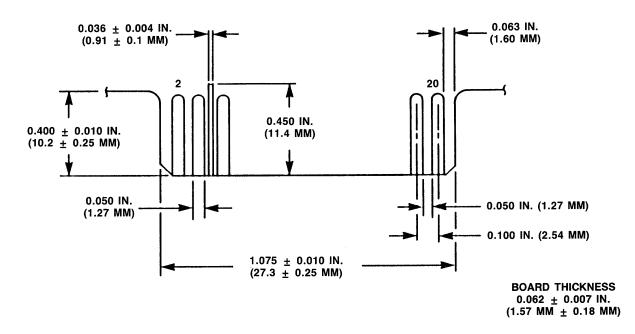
J2 EDGE CONNECTOR DIMENSIONS
